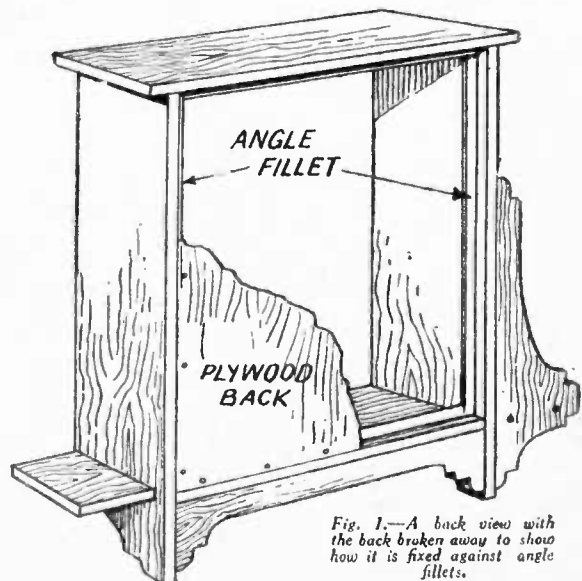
A back view with the back broken away to show how it is fixed against angle fillets.
